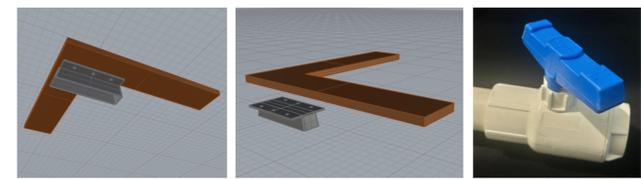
Images and Drawings of the Mechanical Arm and the attachment used to connect it to the valve shown.
